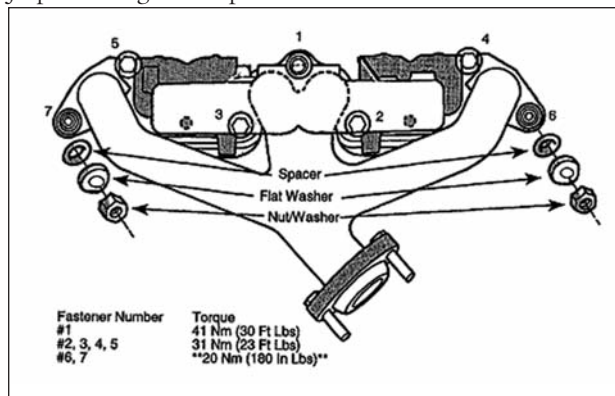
Replace both outer mounting studs, clamps and nuts on Jeep 2.5L engines with new parts and tighten the outer studs to a reduced torque of 180 in.lbs.
